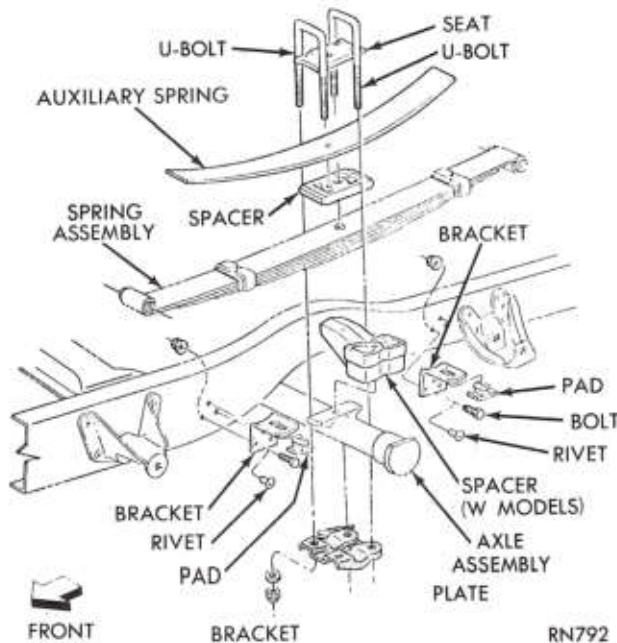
Rear Suspension with Auxiliary Spring D and W250, W350
